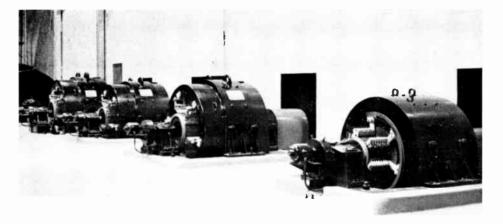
The electric drive of a cold-strip mill, Republic Steel Corp., Niles (O.)
